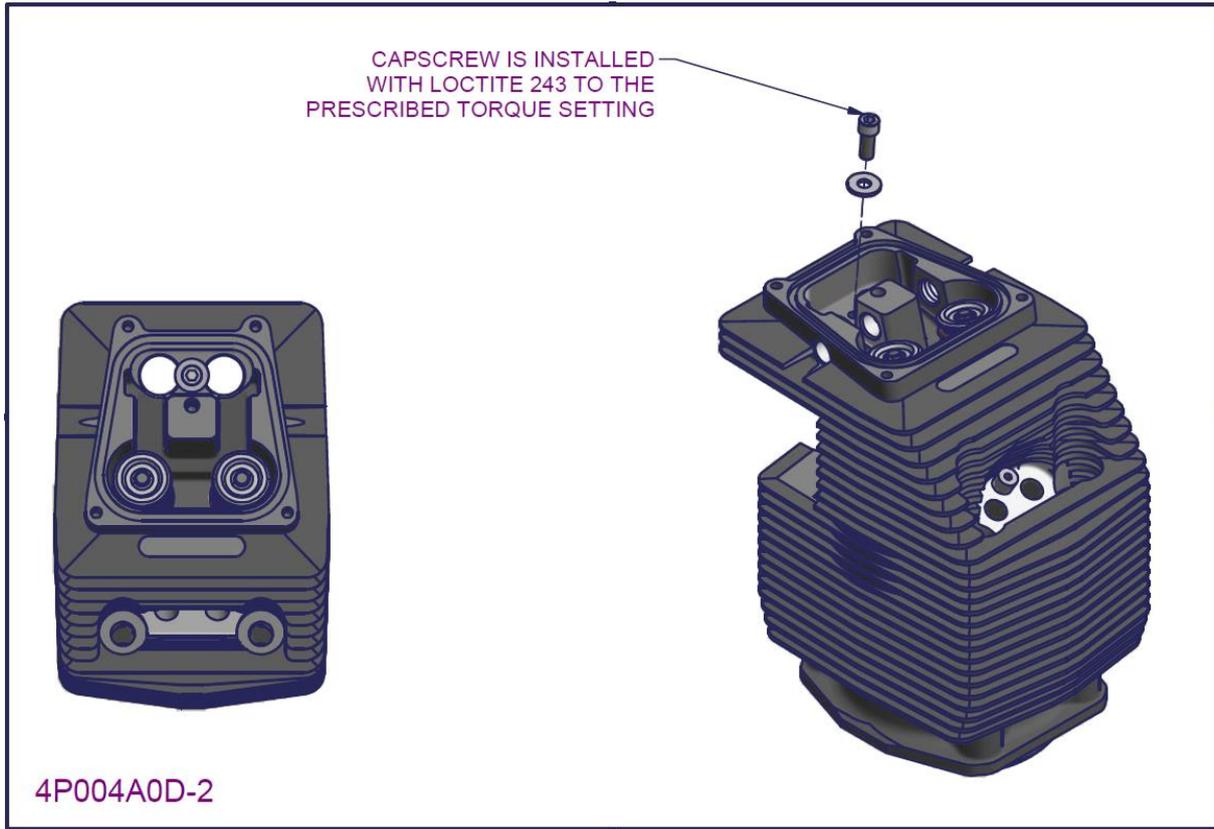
2200/3300 cylinder assembly 5a (external O-ring groove cylinder head)
